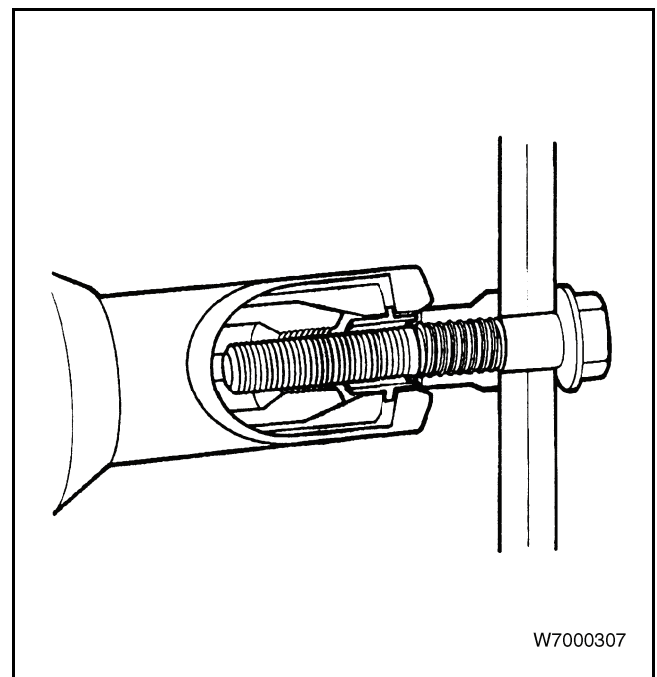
Swaging Collar (HUCK-FIT® Fastener Shown)
